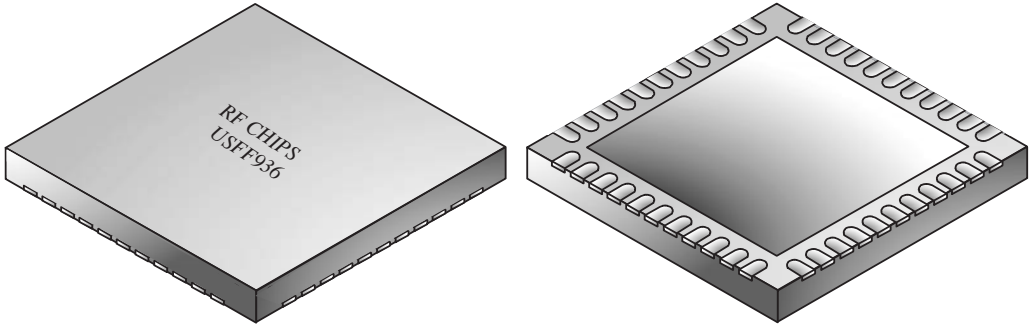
A common 44-pin QFN package with ground slug. QFNs may have almost any number of pins, depending on requirements. Top and bottom of package shown.
